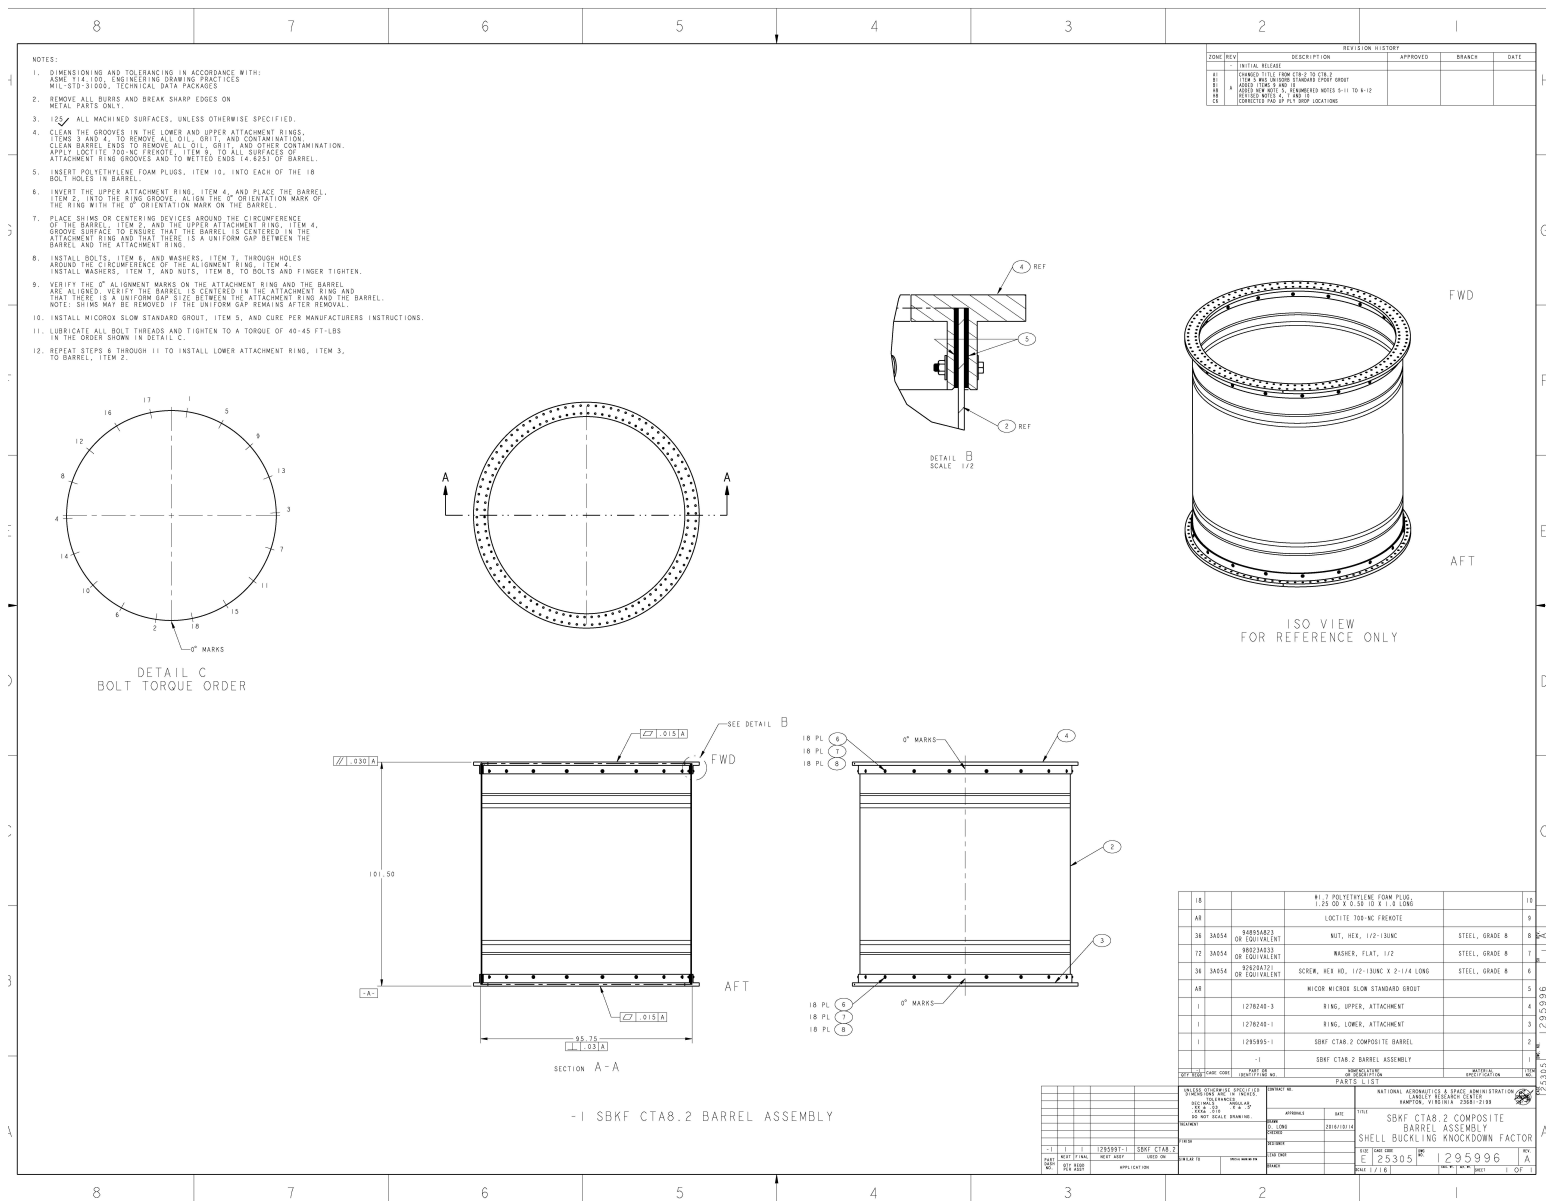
CTA8.2 trimmed and potted in the metallic attachment rings, LaRC drawing 1295996 Rev. A.
